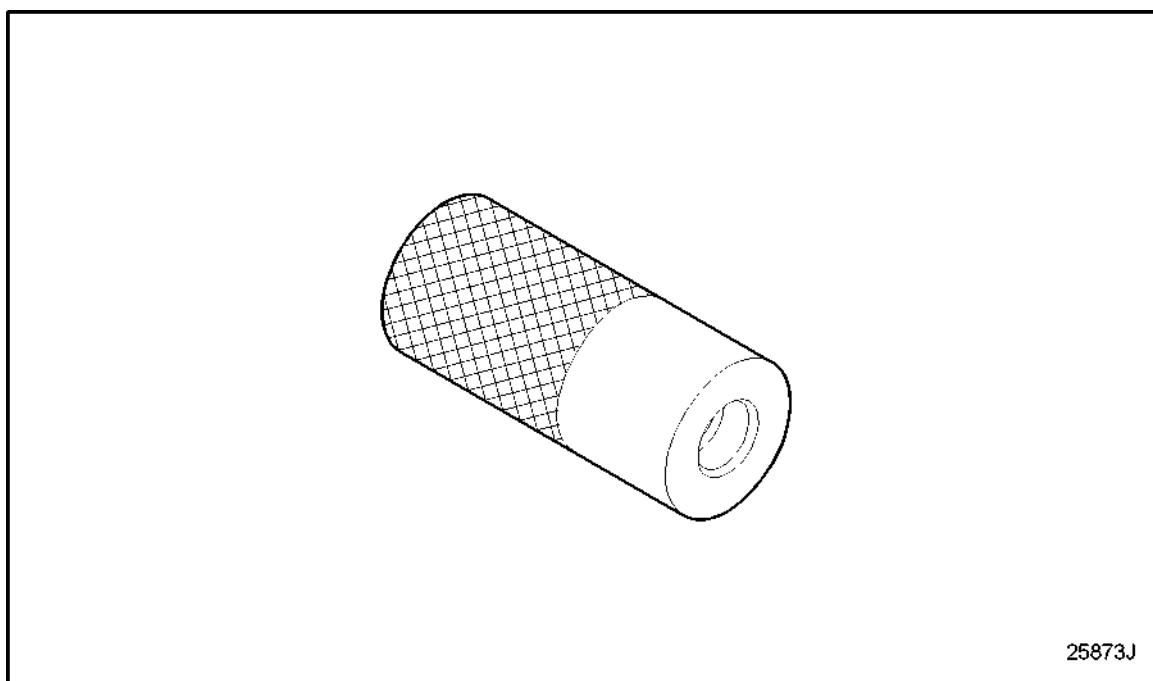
Valve Guide Installer (4 Valve),J 21520
